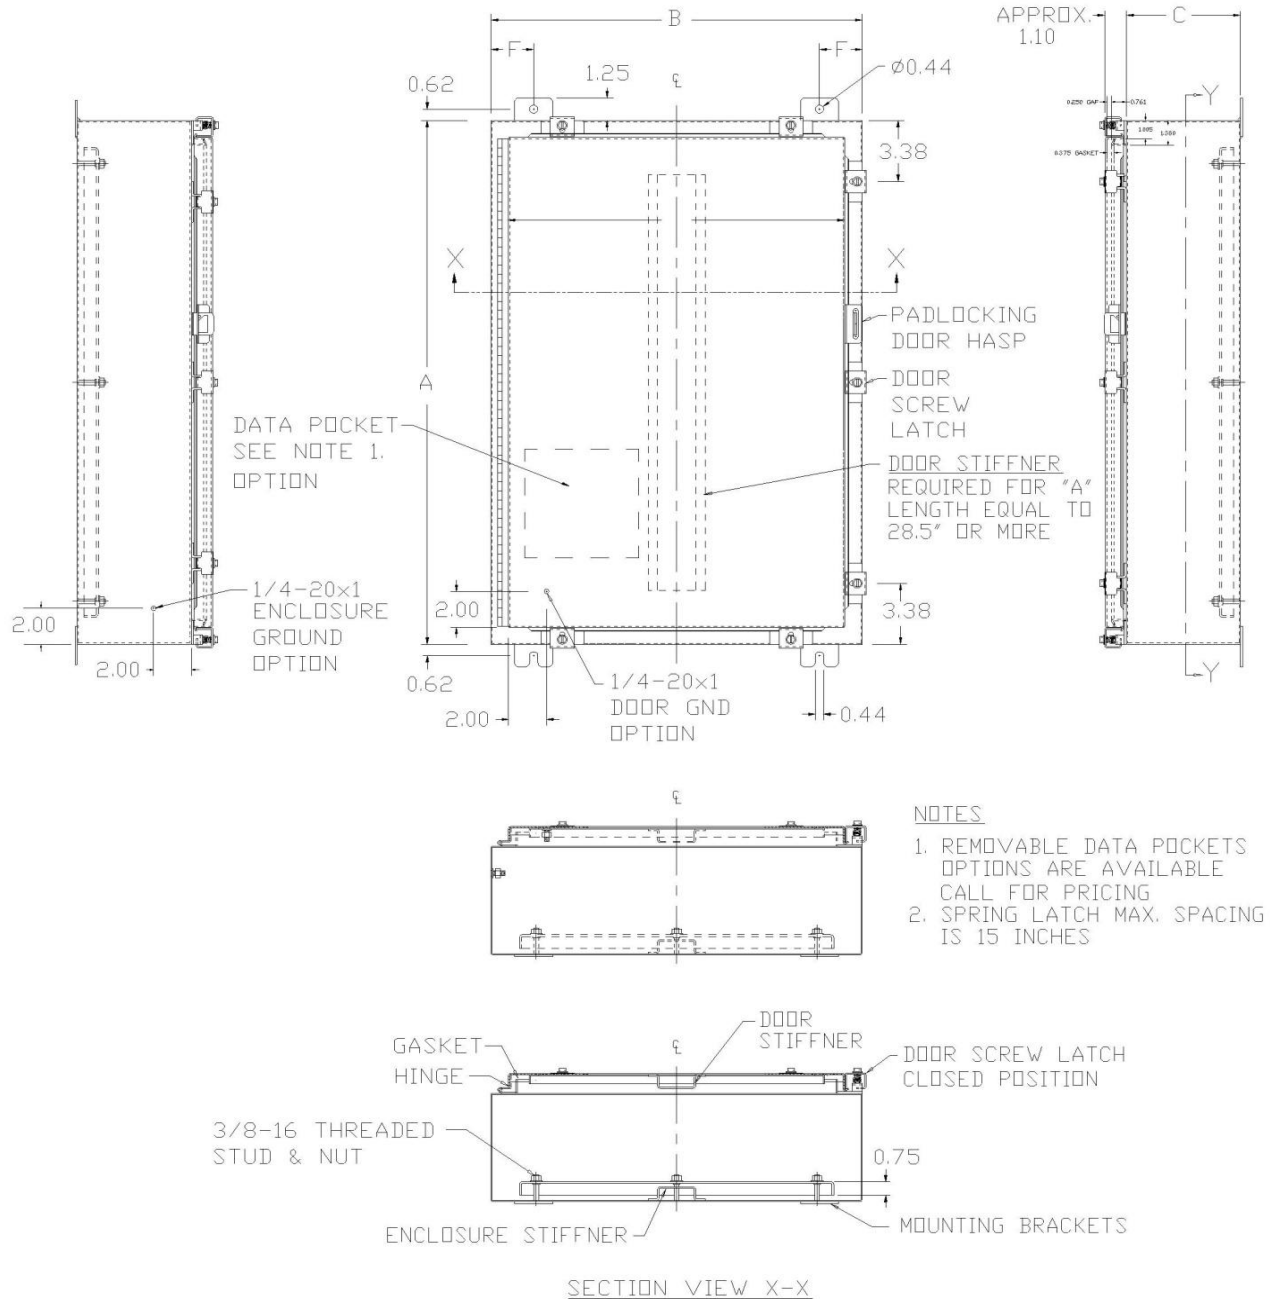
ENCLOSURE DIMENSIONED OUTLINE DRAWINGS
